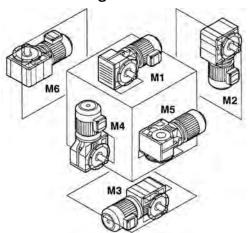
Spatial Positions of Gear Motors (Example SEW-EURODRIVE)
